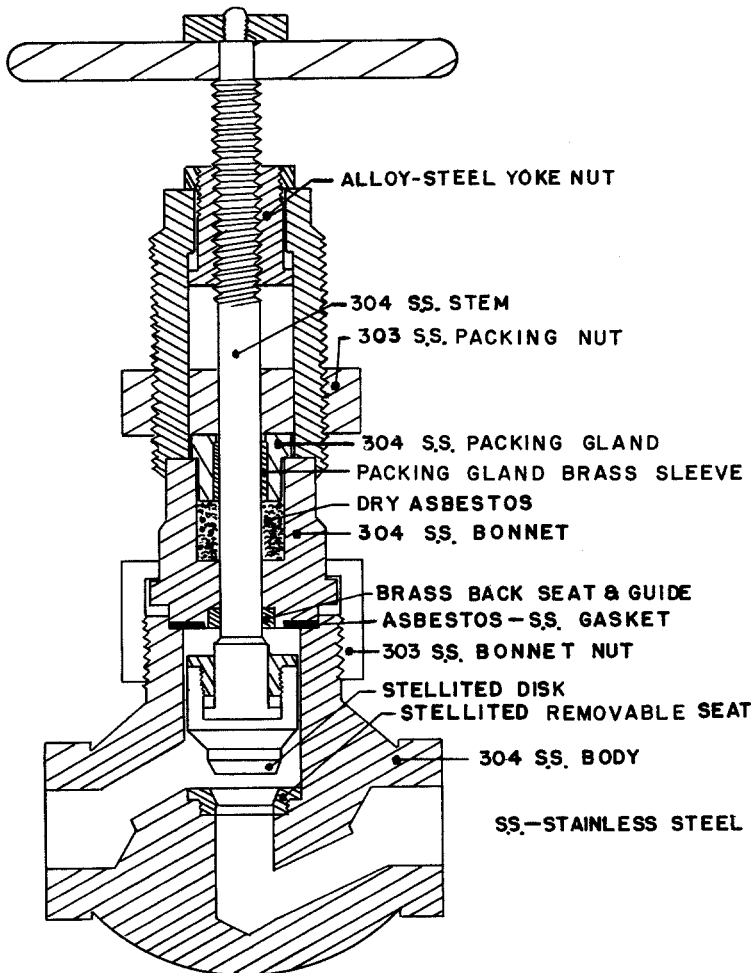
1,500 p.s.i.-1,000° F. Valve for Steam or Steam-Oxygen Service.
